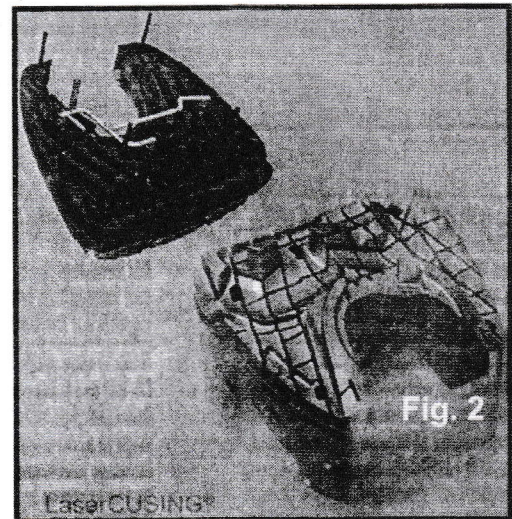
illustrates one such layout in the mould core for the cover of a technical gadget.
